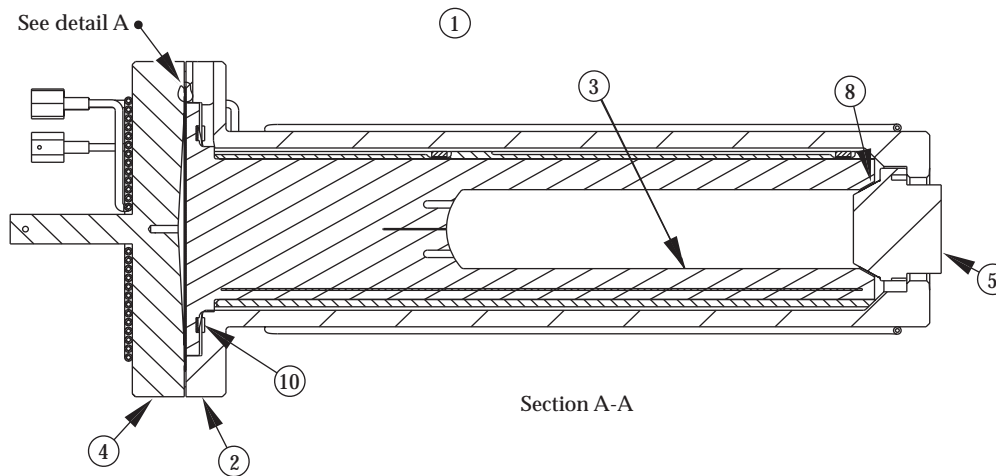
Cutaway view of the permeation cell. Tab 5 is the removable high-pressure cap, and tab 8 is the seal with the copper gasket. (NIF-0603-07061pb01)
